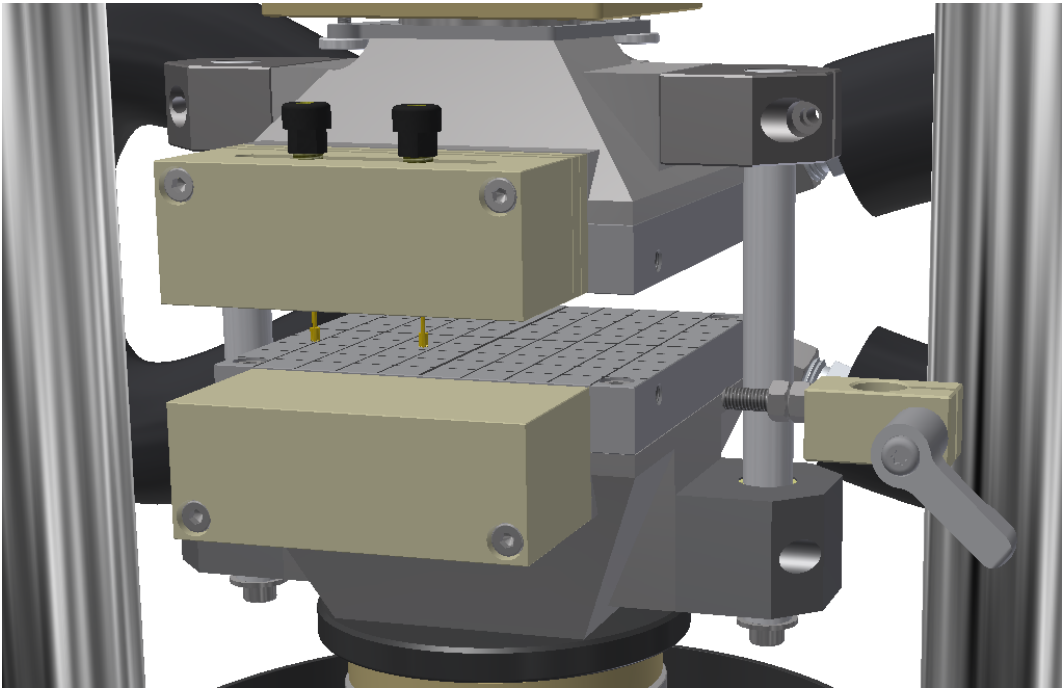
Attaching the sensor mount to the CompreCell Pouch
